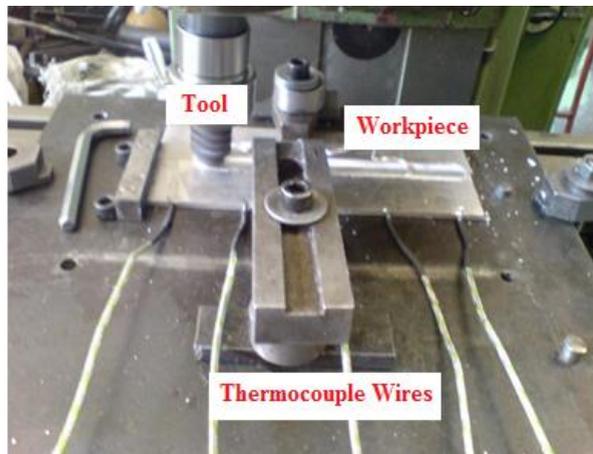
The Welding machine used in this research with attached thermocouples on workpiece
